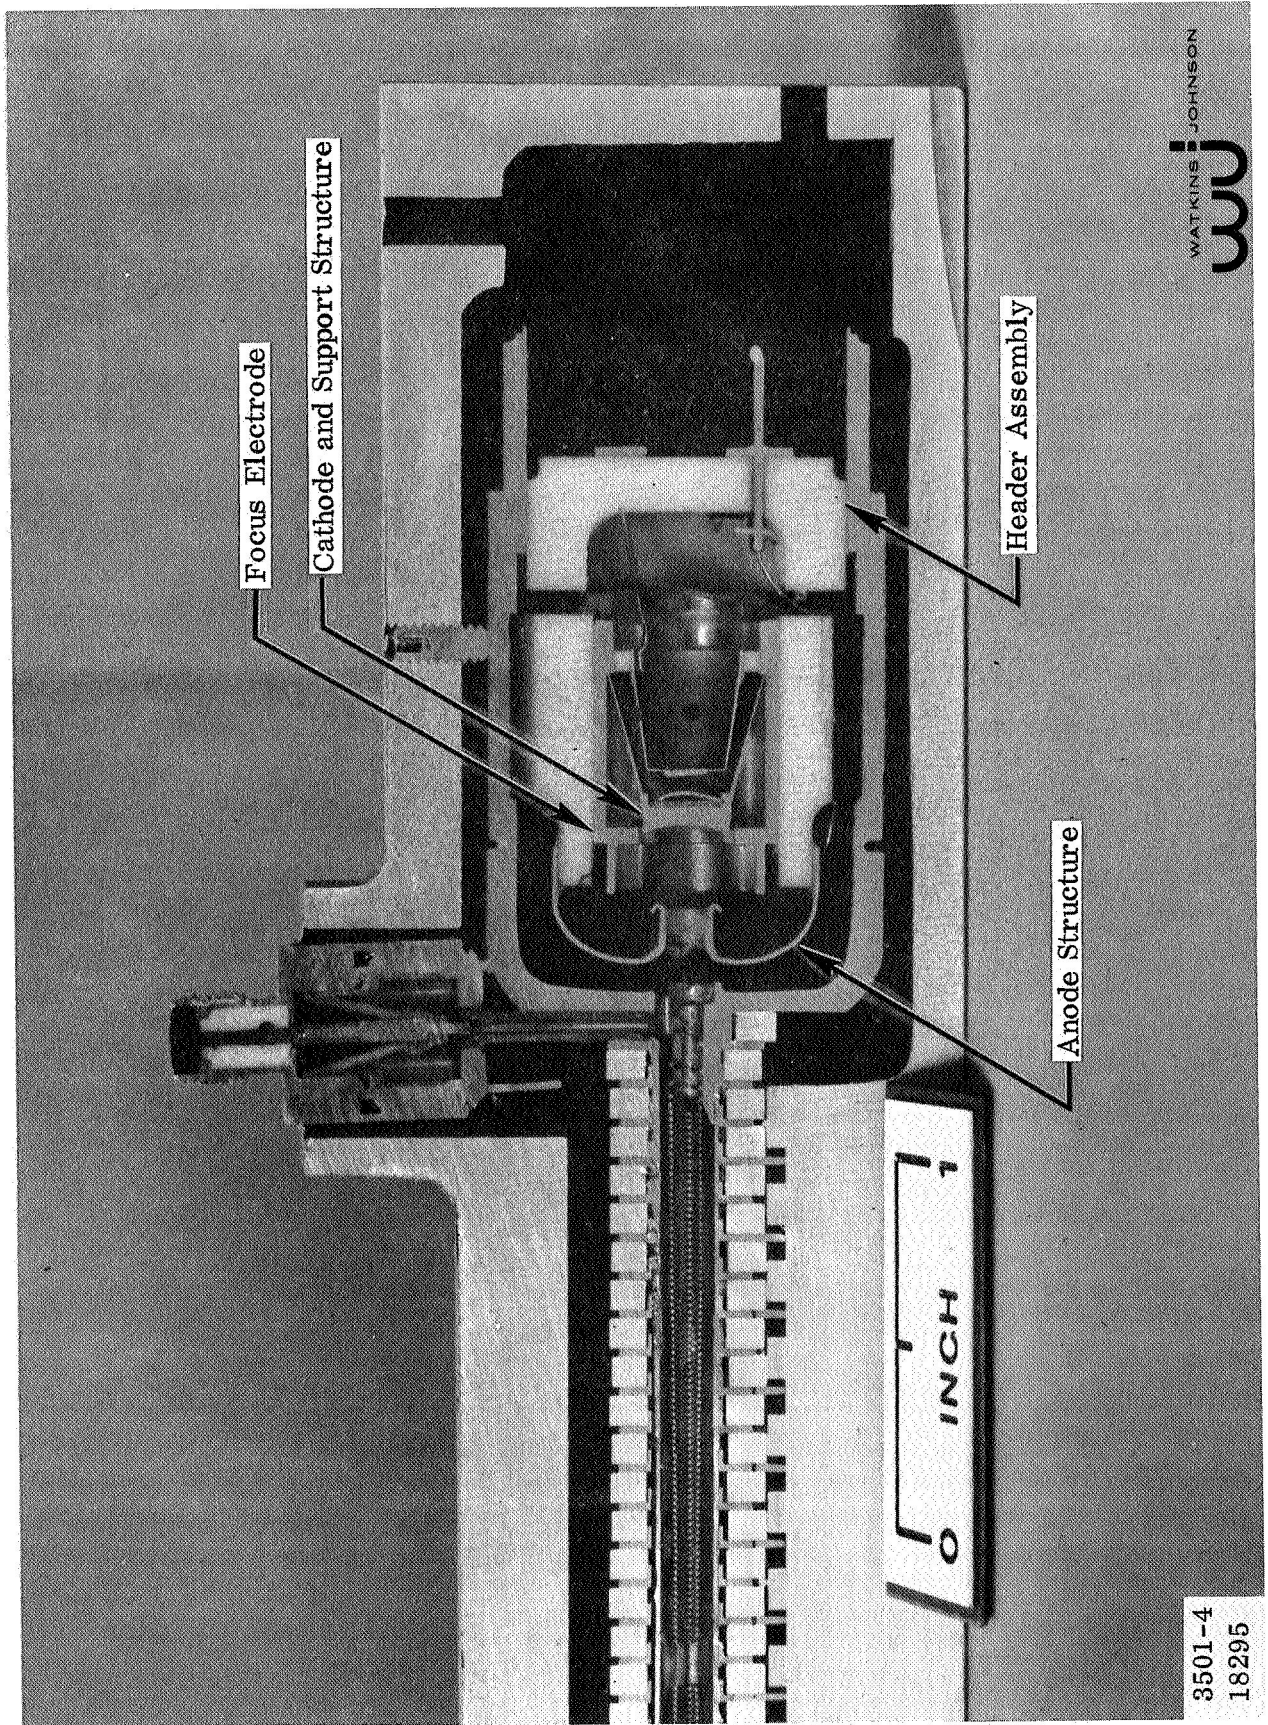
Photograph of a WJ-398 TWT machined apart to show the assembly details in the region of the electron gun.
